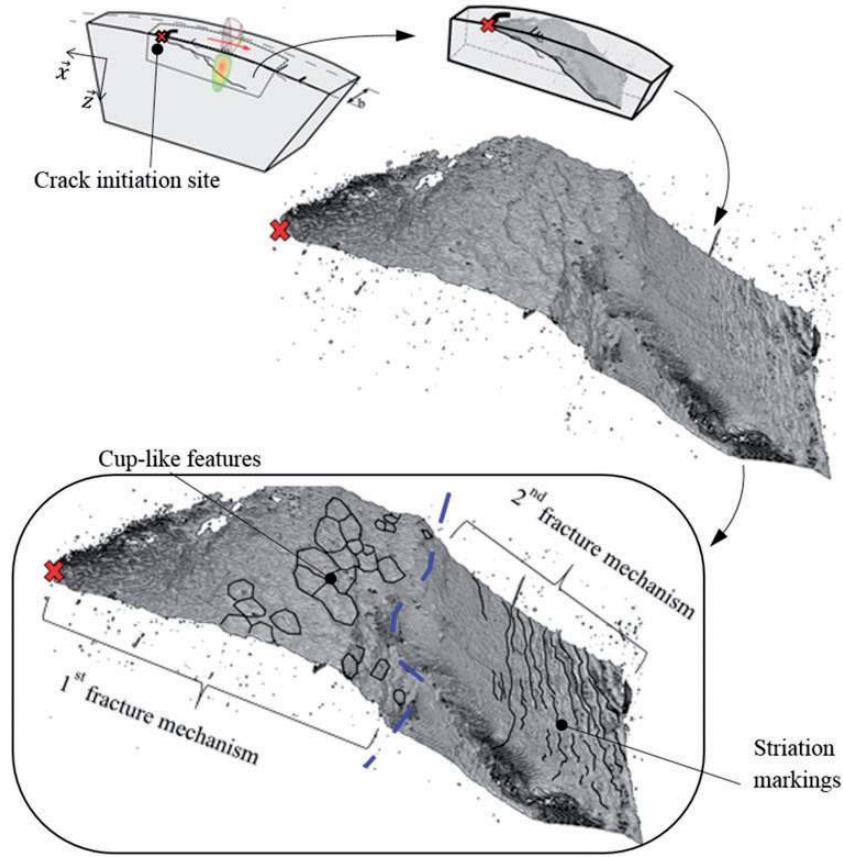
Half part of a RCF crack network displaying two different fracture surfaces.
